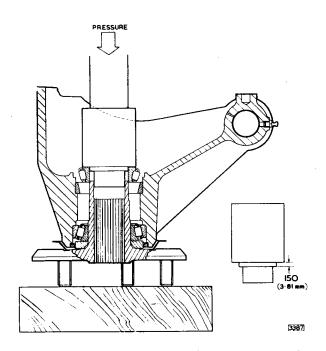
Pressing in the hub inner bearing inner race using the master spacer (Churchill Tool No. J.15).
